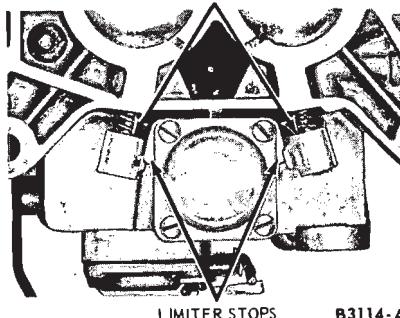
Autolite Model 2100-D 2-V Idle Fuel Mixture Adjusting Limiters and Limiter Stops—Bottom
